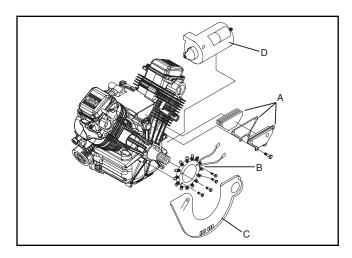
Remove Alternator, Backplate, Starter Motor
